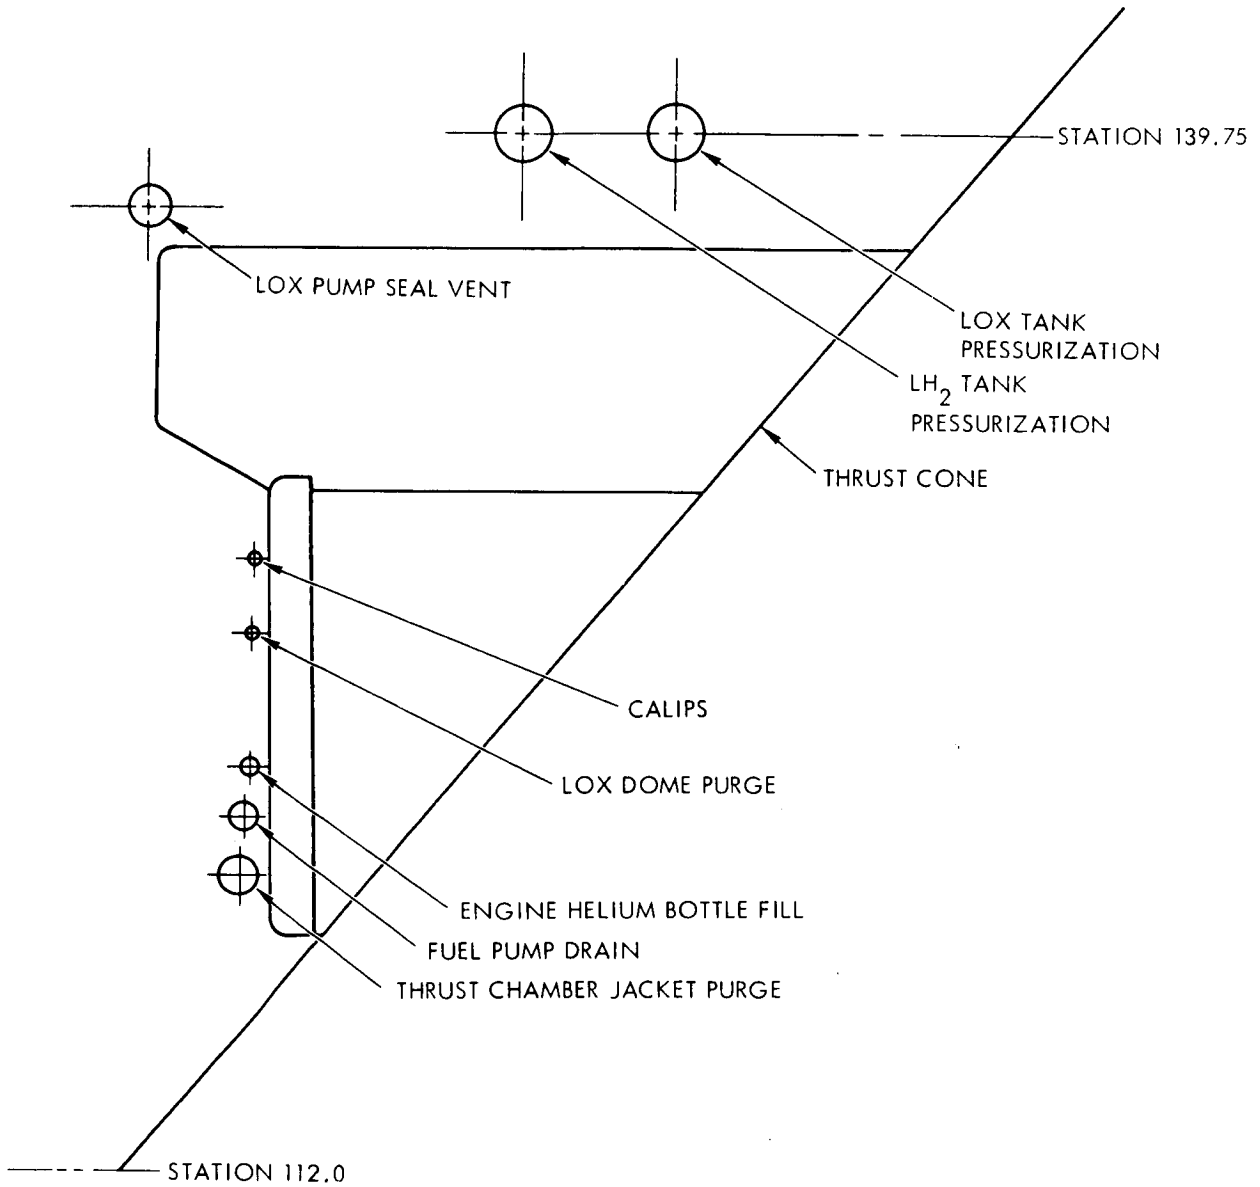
Installation of J-2S Engine Service Lines (Section B-B)
